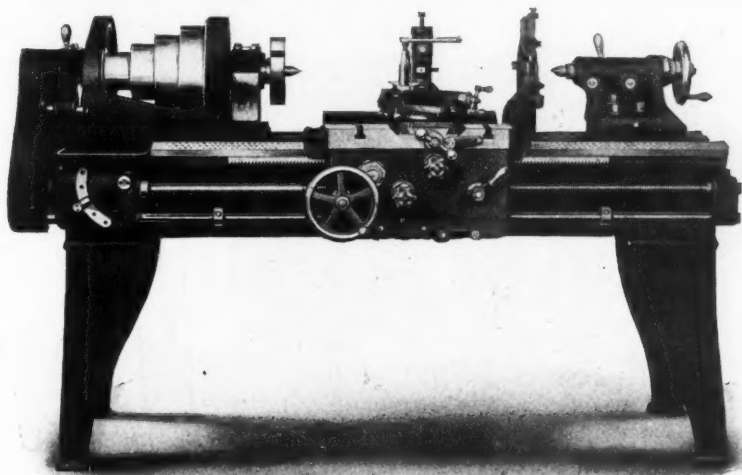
Fifteen-inch Engine Lathe built by Greaves, Klusman & Co.
